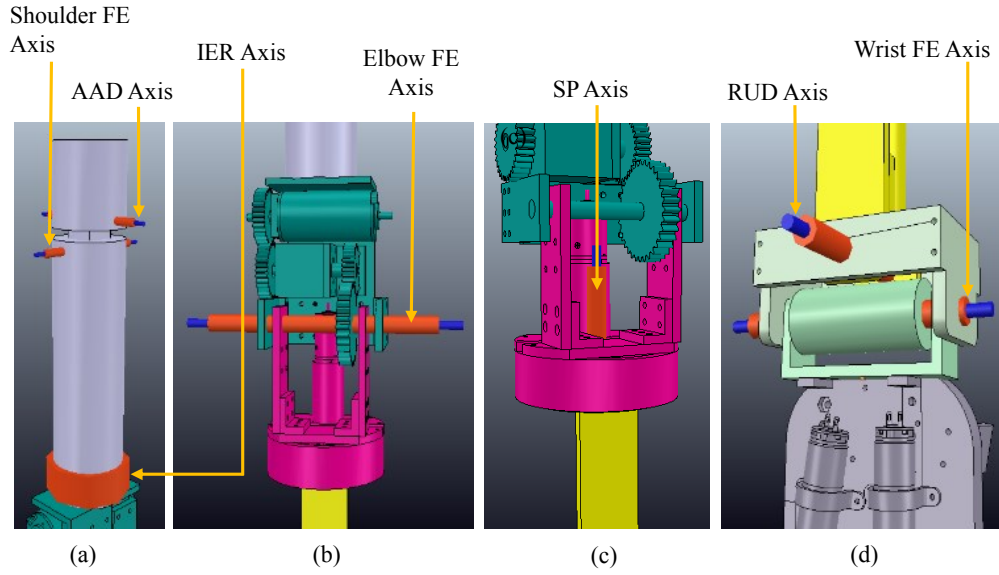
DOF at each joint of the simulator (joint axes are shown in orange colour) (a) Shoulder joint, (b) Elbow joint, (c) Forearm SP, (d) Wrist joint
